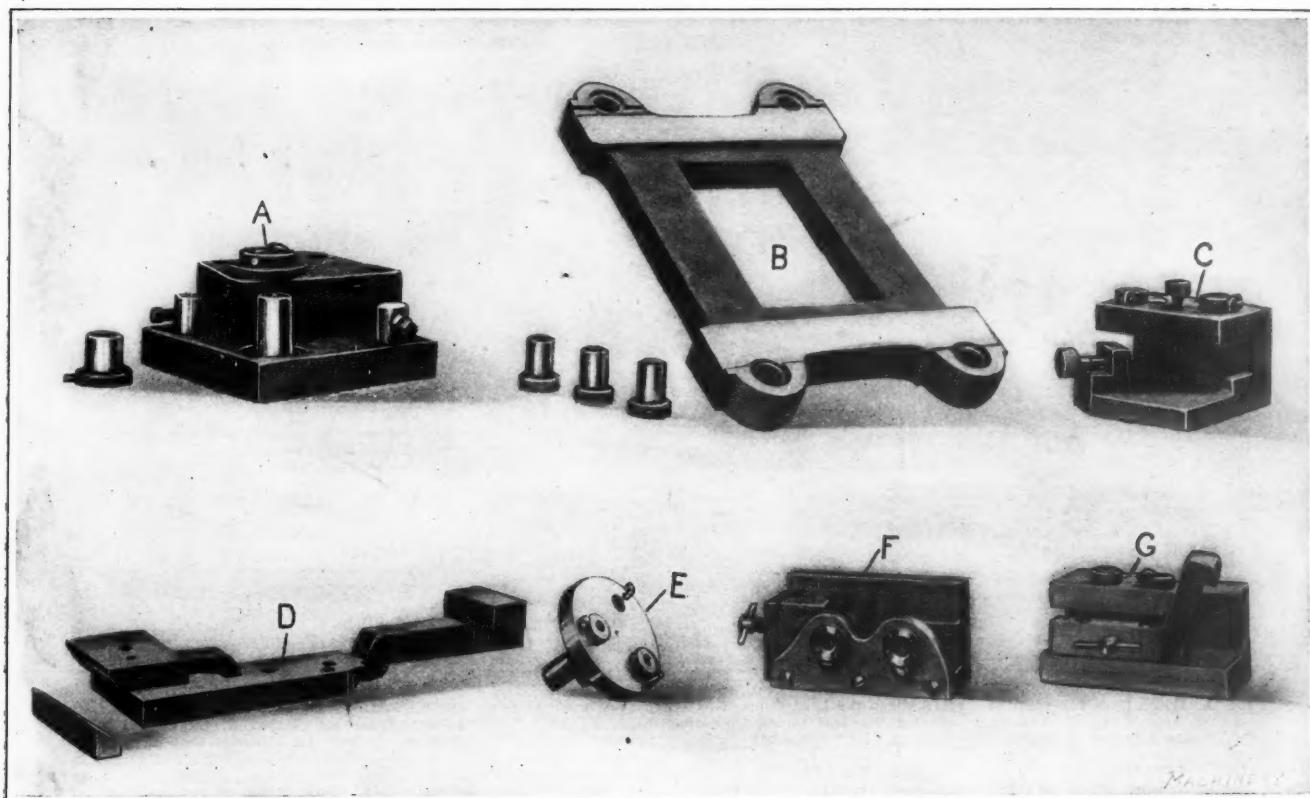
A, Drill Jig for Index Levers; B, Drill Jig for Clamping Screws for Carriage and Cap; C, Drill Jig for Cross-slide Stop; D, Drill Jig for Cross-slide Cam Fork Bearing and Hole for Lock Bolt Spring; E, Drill Jig for Gear-box Pawl Holder; F, Drill Jig for Clutch Shifter Arm; G, Drill Jig for Feed Chuck Arm
